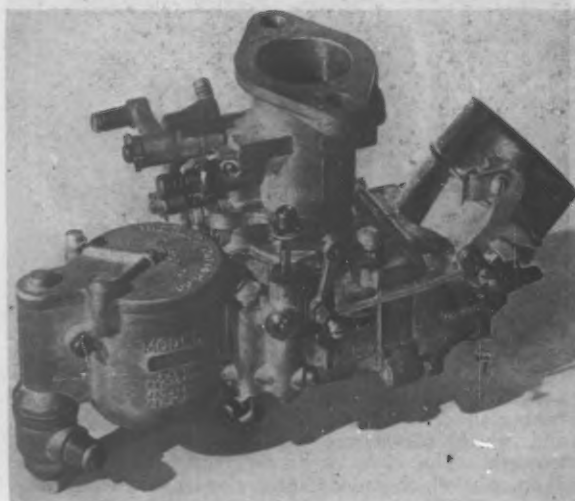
Automobile Carburetor Made Up of Several Assembled Zinc-Base Die Castings (Above)
